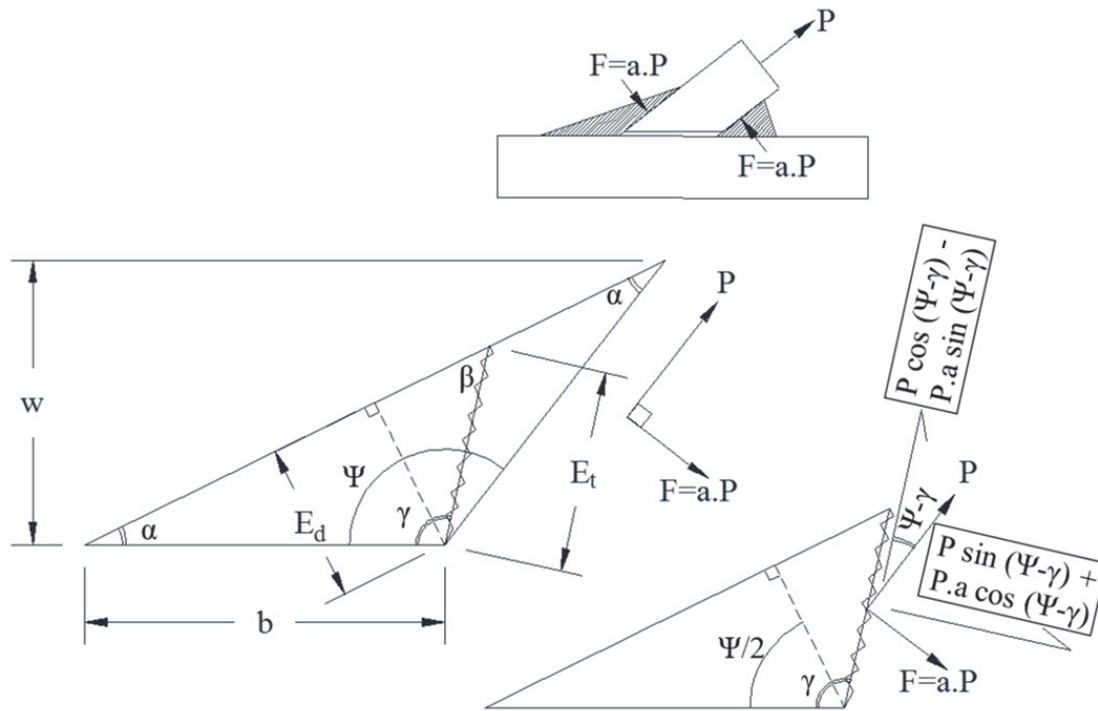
Skewed T-Joint with double fillet welds.
